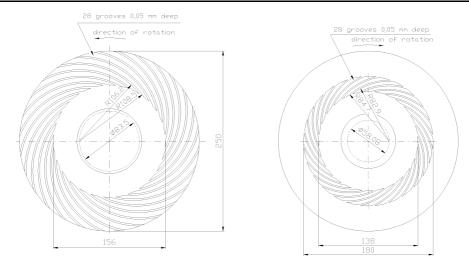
Spiral groove thrust runner (main bearing – left, auxiliary bearing – right)
